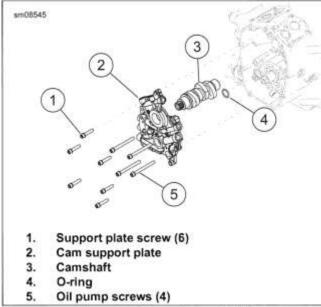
Cam Support Plate INSPECT CAM.COMPONENT
